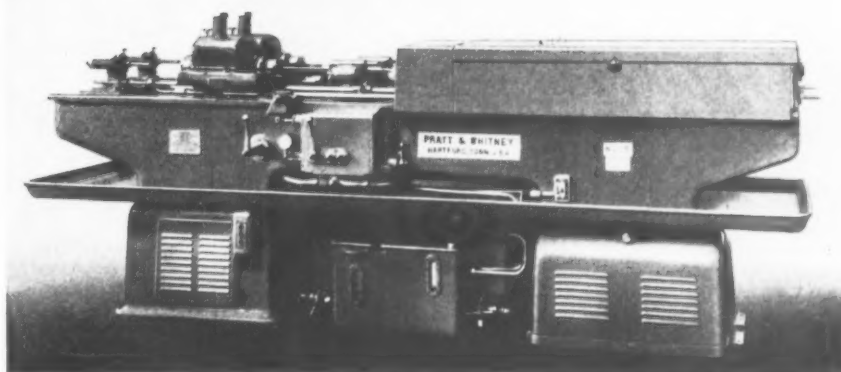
Pratt & Whitney No. 1/2B Gun-barrel Rifling Machine
